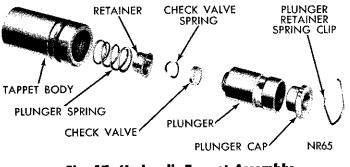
Hydraulic Tappet Assembly (Disassembled View)
